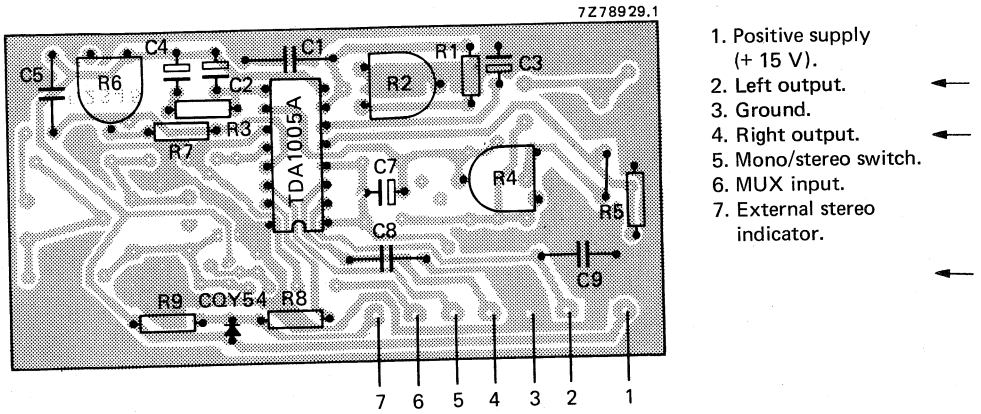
Printed-circuit board component side of a t.d.m. decoder, showing component layout. For circuit diagram see Fig. 10.
